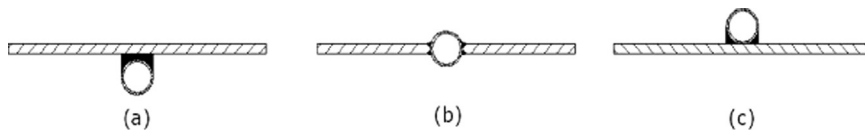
Positions of the tube containing the fluid respecting to the absorber plate: (a) welded underneath the plate, (b) welded between plate, and (c) welded above the plate.
